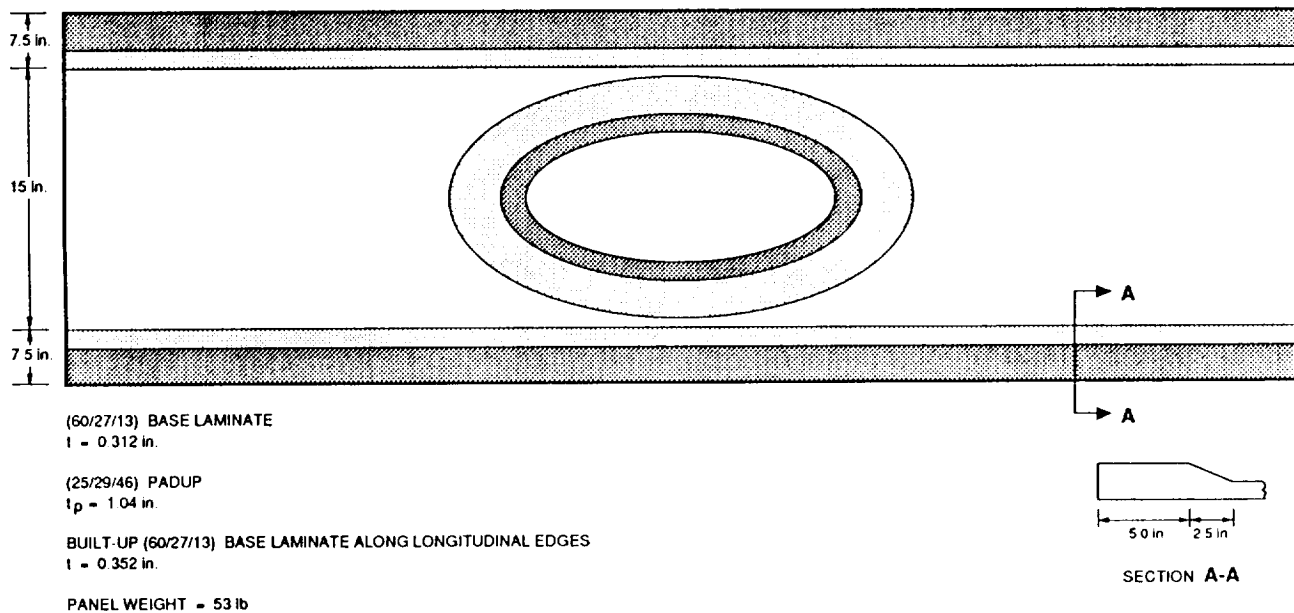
Modified Design for Lower Wing Skin Access Panel.
